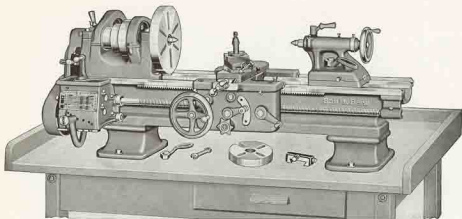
Cat. No. 11-AB, 11" x 4" Series "R" Quick Change Gear Countershaft Drive Bench Lathe complete as shown.....\$433.00
